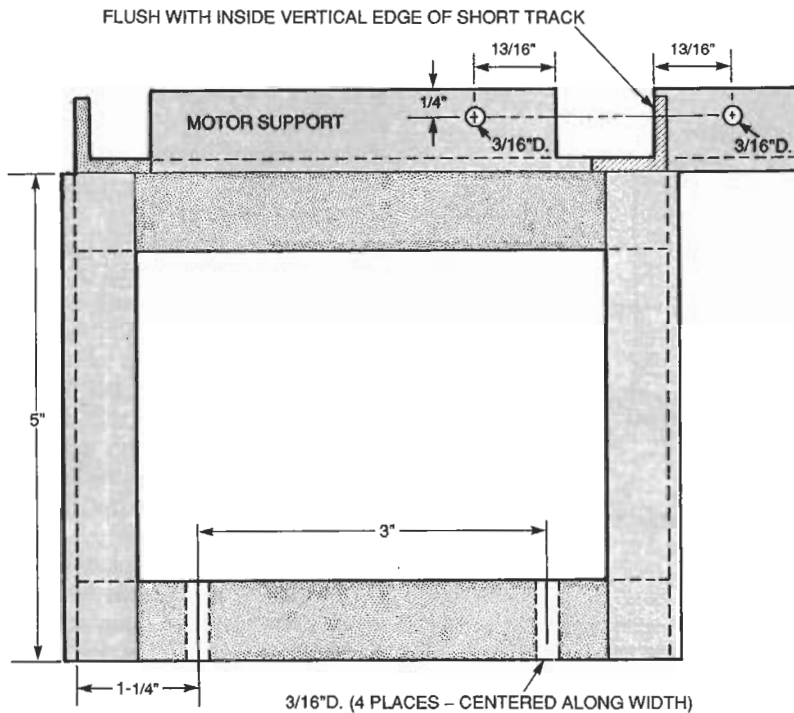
This side view of the drill-caddy support details the holes where the motor mounts and the notch that provides clearance for the threaded rod.
